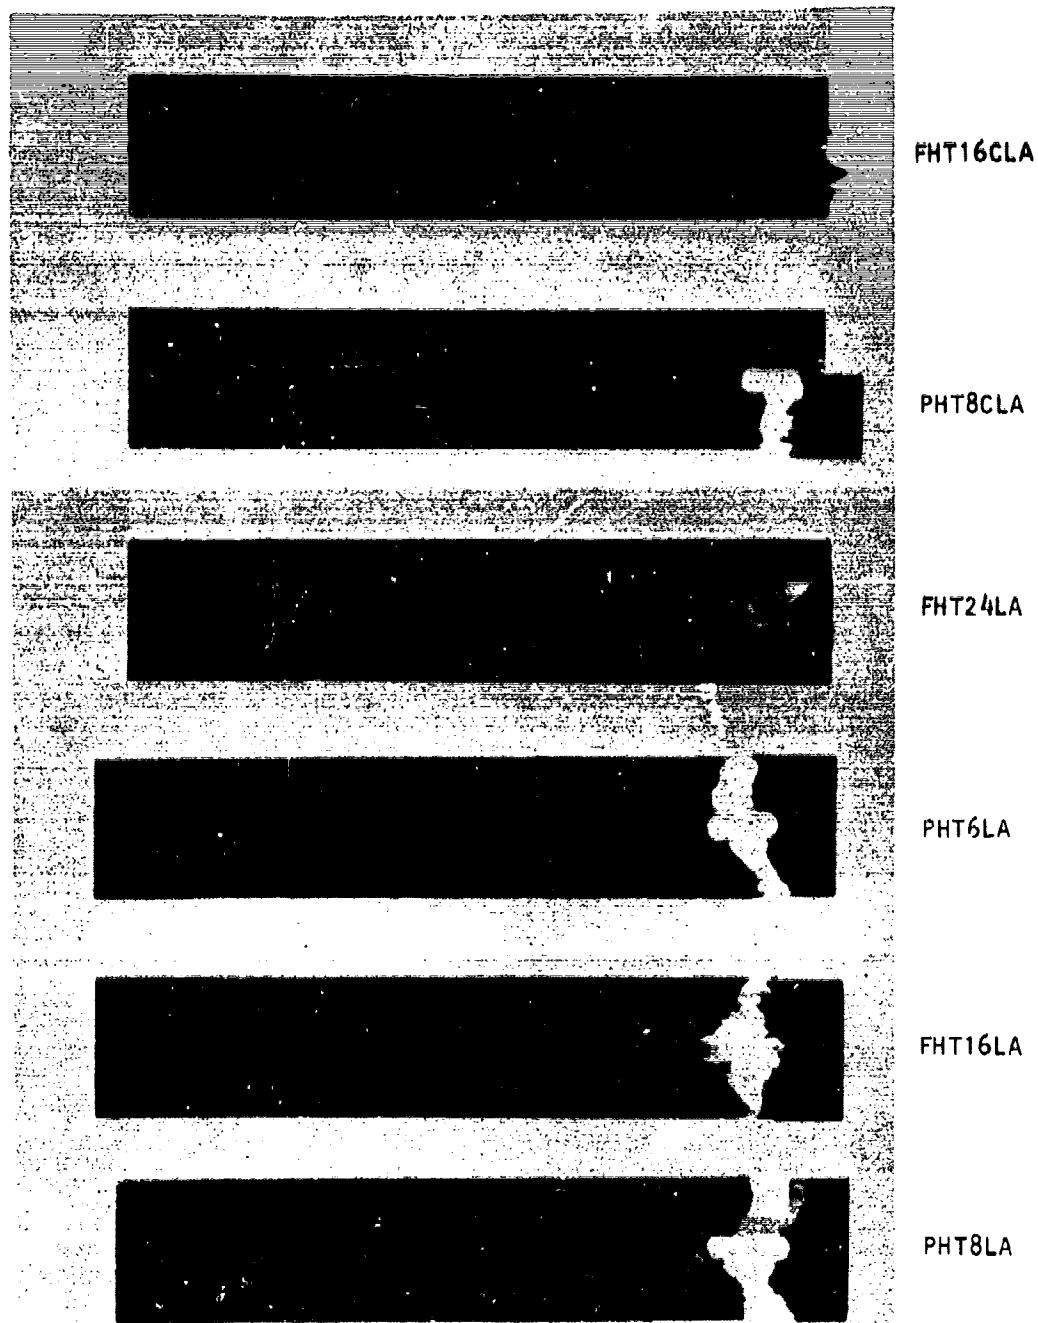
Typical Failed Mechanical Joint Fatigue Specimens - Flush Head and Protruding Head Fastener Types
